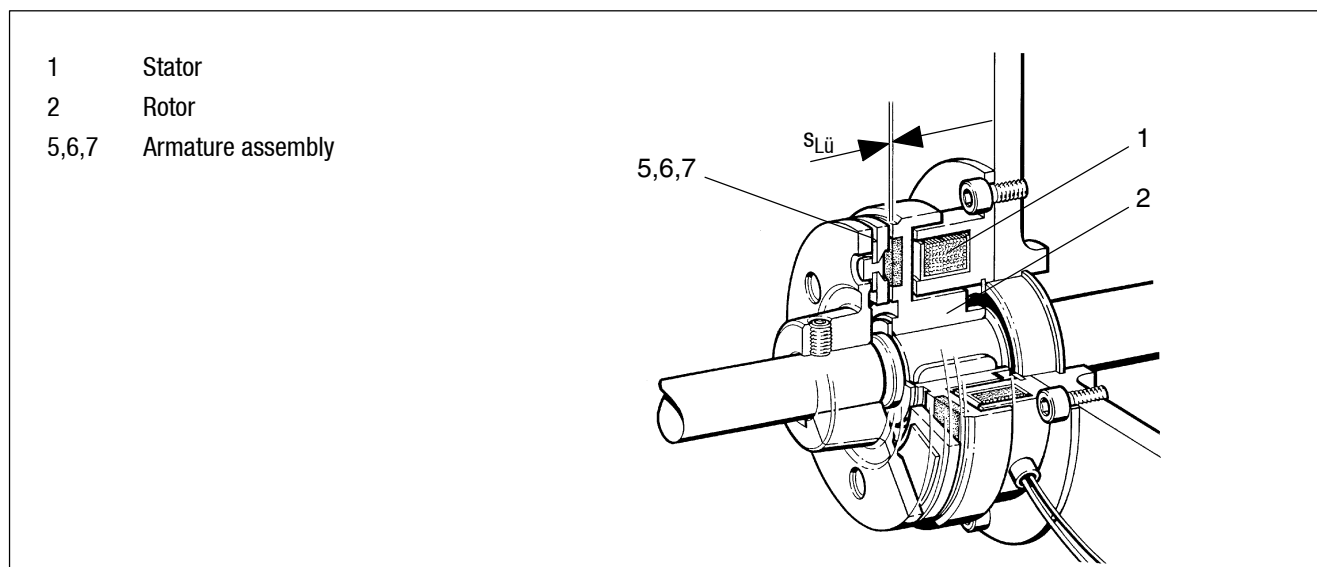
Flange-mounted clutch INTORQ 14.105.□□.1.1
